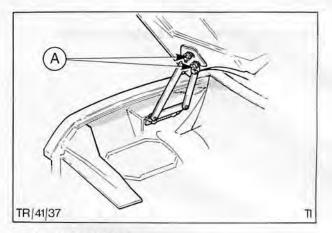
Hood hinge bolts A – Bolt and washer assemblies
